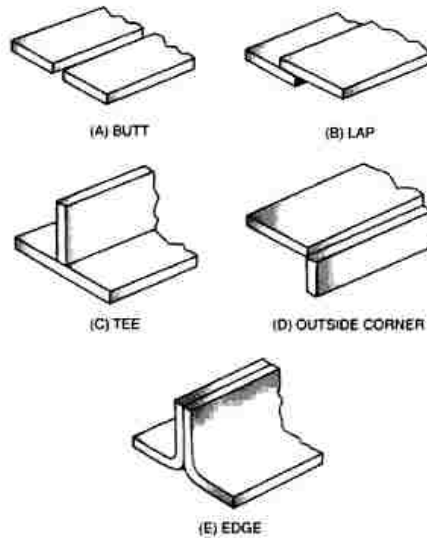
Five basic types of welding joint designs. [21]
